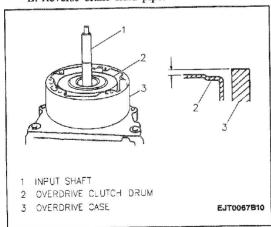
Measuring Overdrive Clutch Drum and Case Surface
